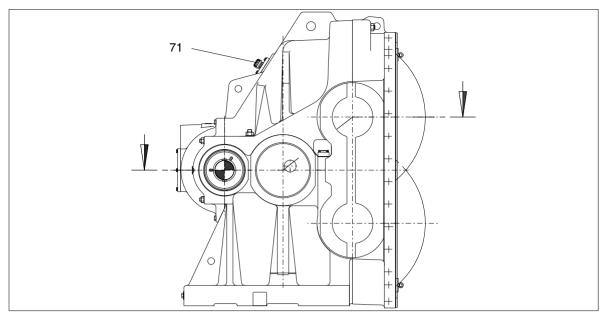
Spare-parts drawing 1/2 for drive version A/x, B/x, C/x
